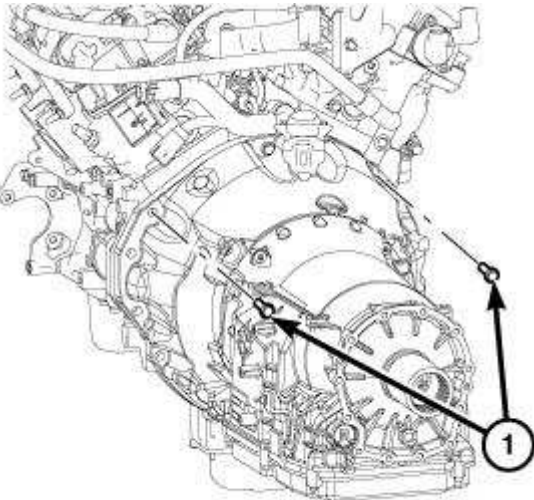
Upper Side Transmission-To-Engine Retaining Bolts
